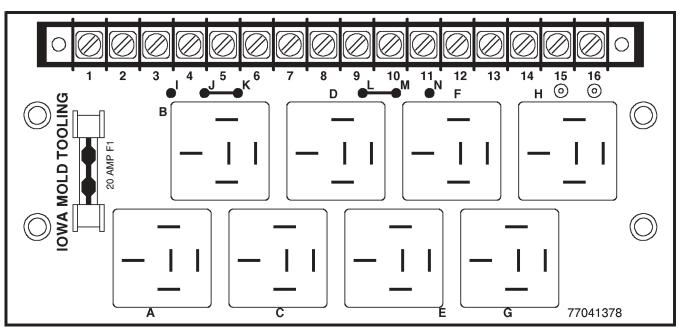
RELAY BOARD (77041378) WIRING INSTRUCTIONS
